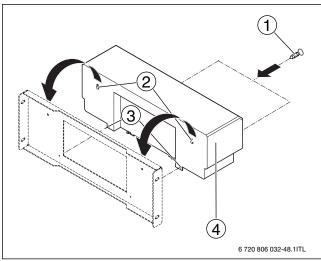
Fitting the control unit for boiler sizes 1040 kW to 1850 kW
